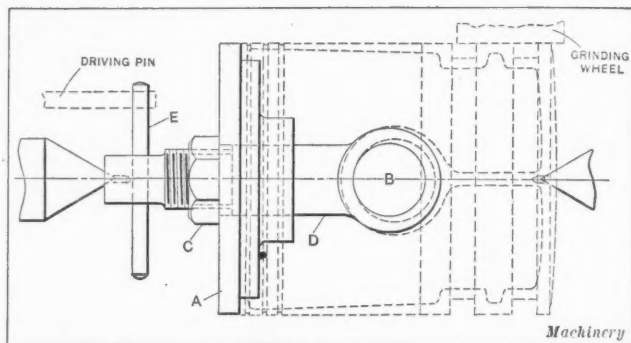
Method of holding Gas Engine Piston for External Grinding
